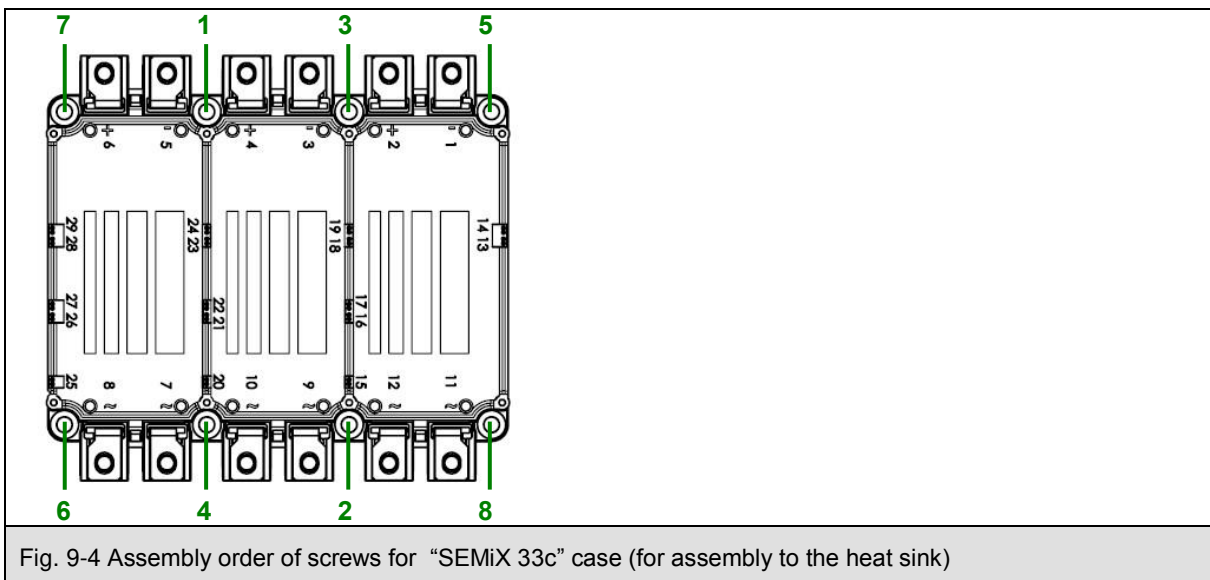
Assembly order of screws for “SEMiX 33c” case (for assembly to the heat sink)
